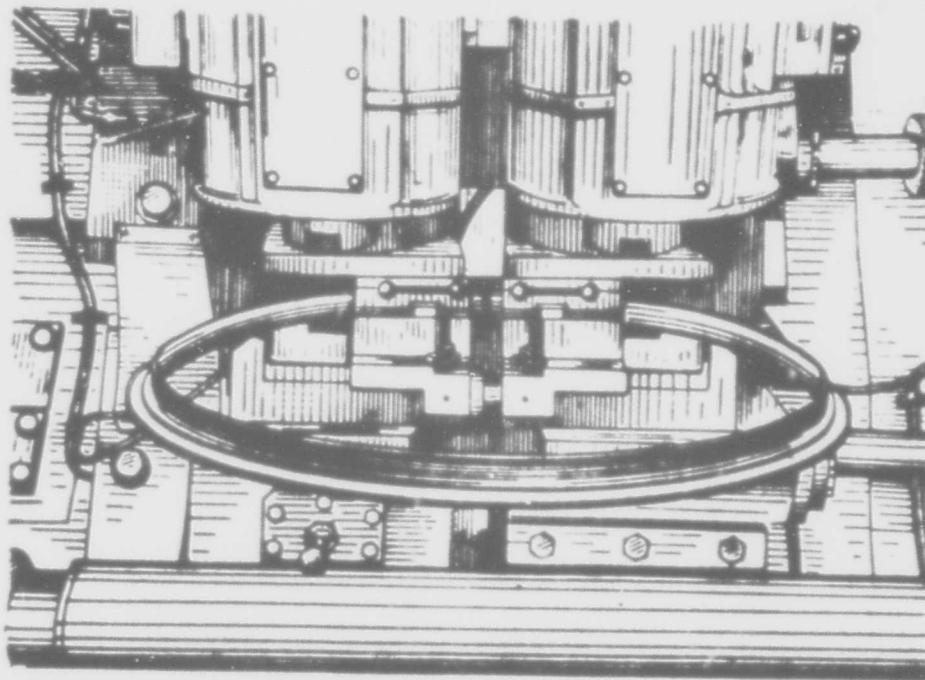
Installation of annular blank for welding on machine MGSA-300.
